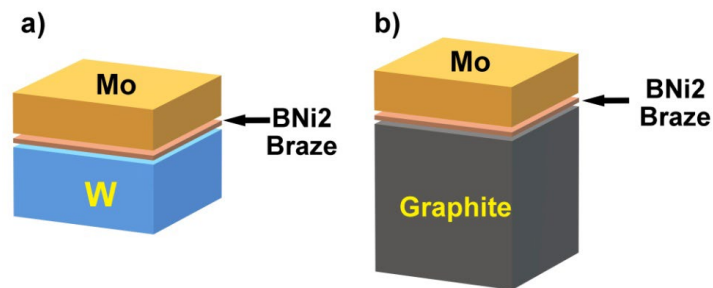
Schematic diagram of assemblies for Mo/W brazing a) and Mo/graphite brazing b) with BNi2 braze.
